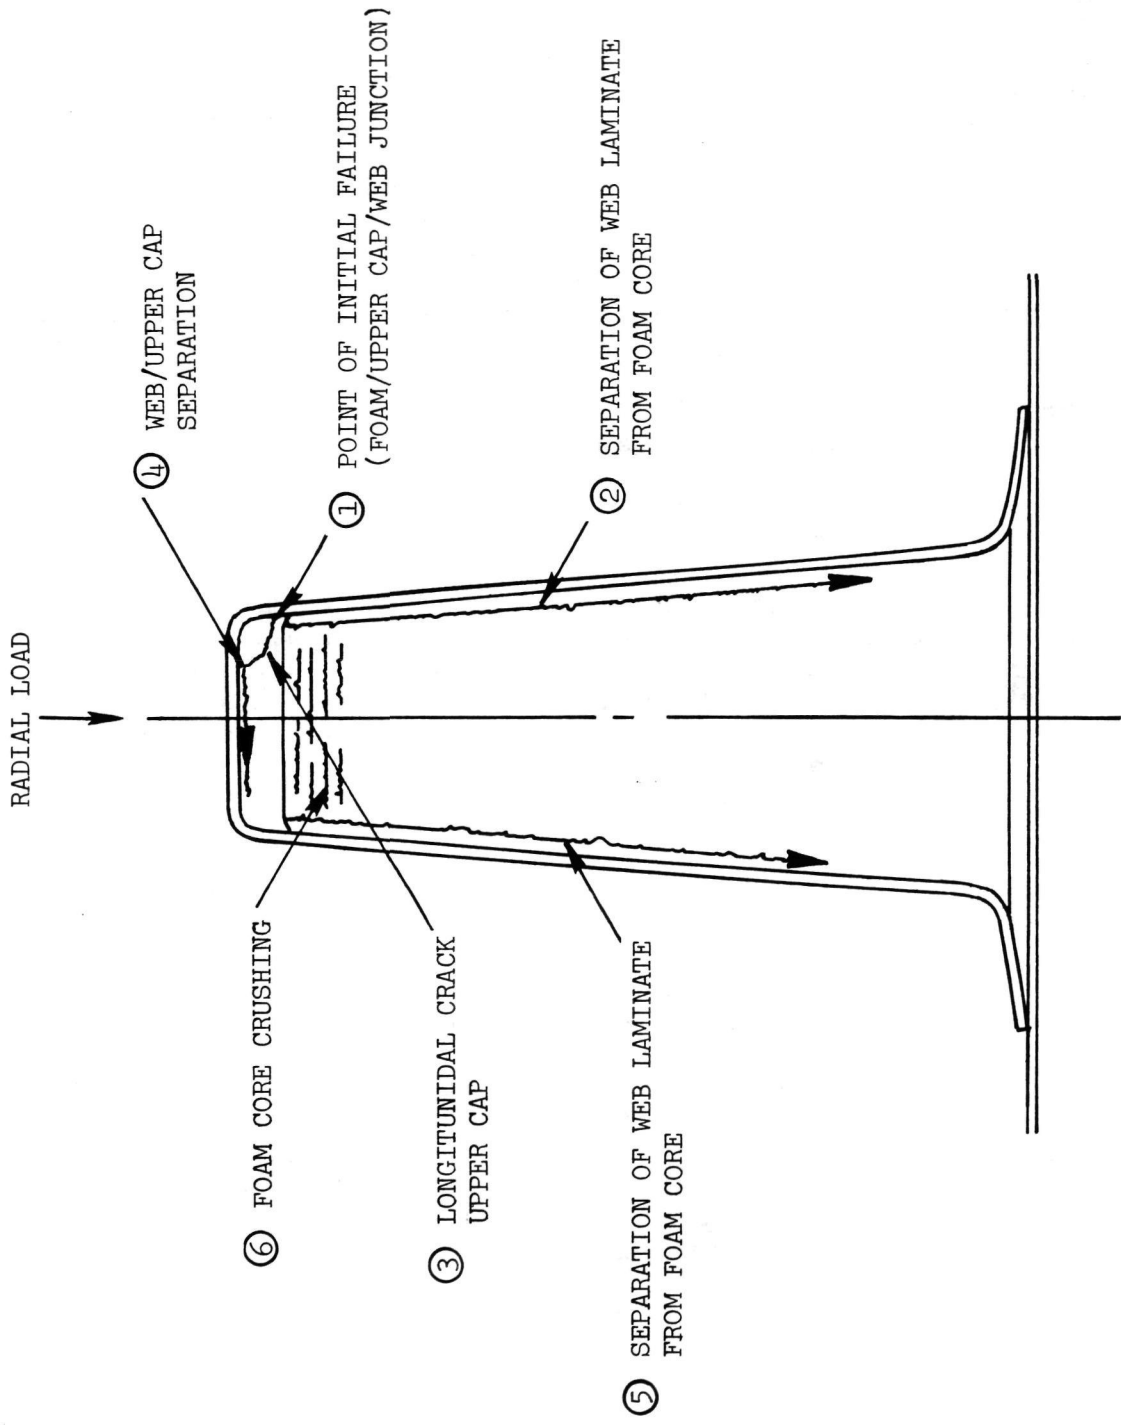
CROSS SECTION OF FRAME SPECIMEN, POINT OF INITIAL FAILURE, AND SEQUENCE OF FRACTURE.
